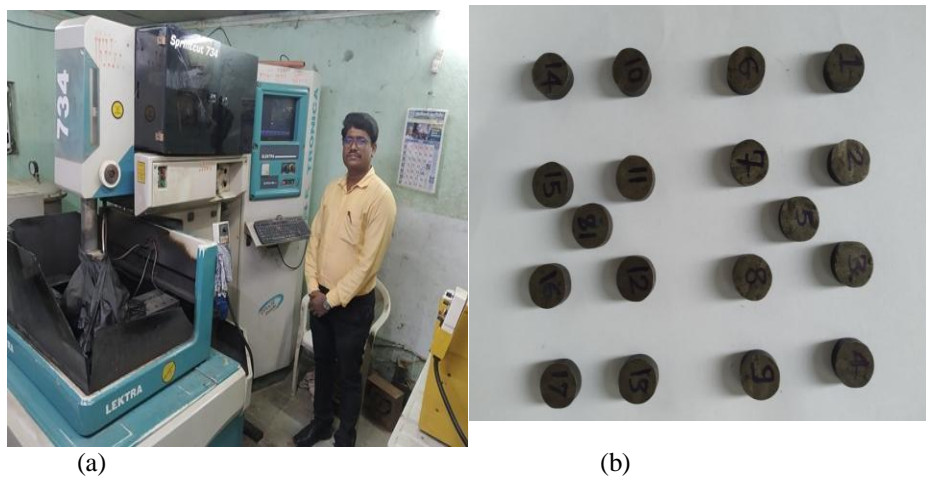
(a) Wire EDM machine Set up (b) Machined Specimen
